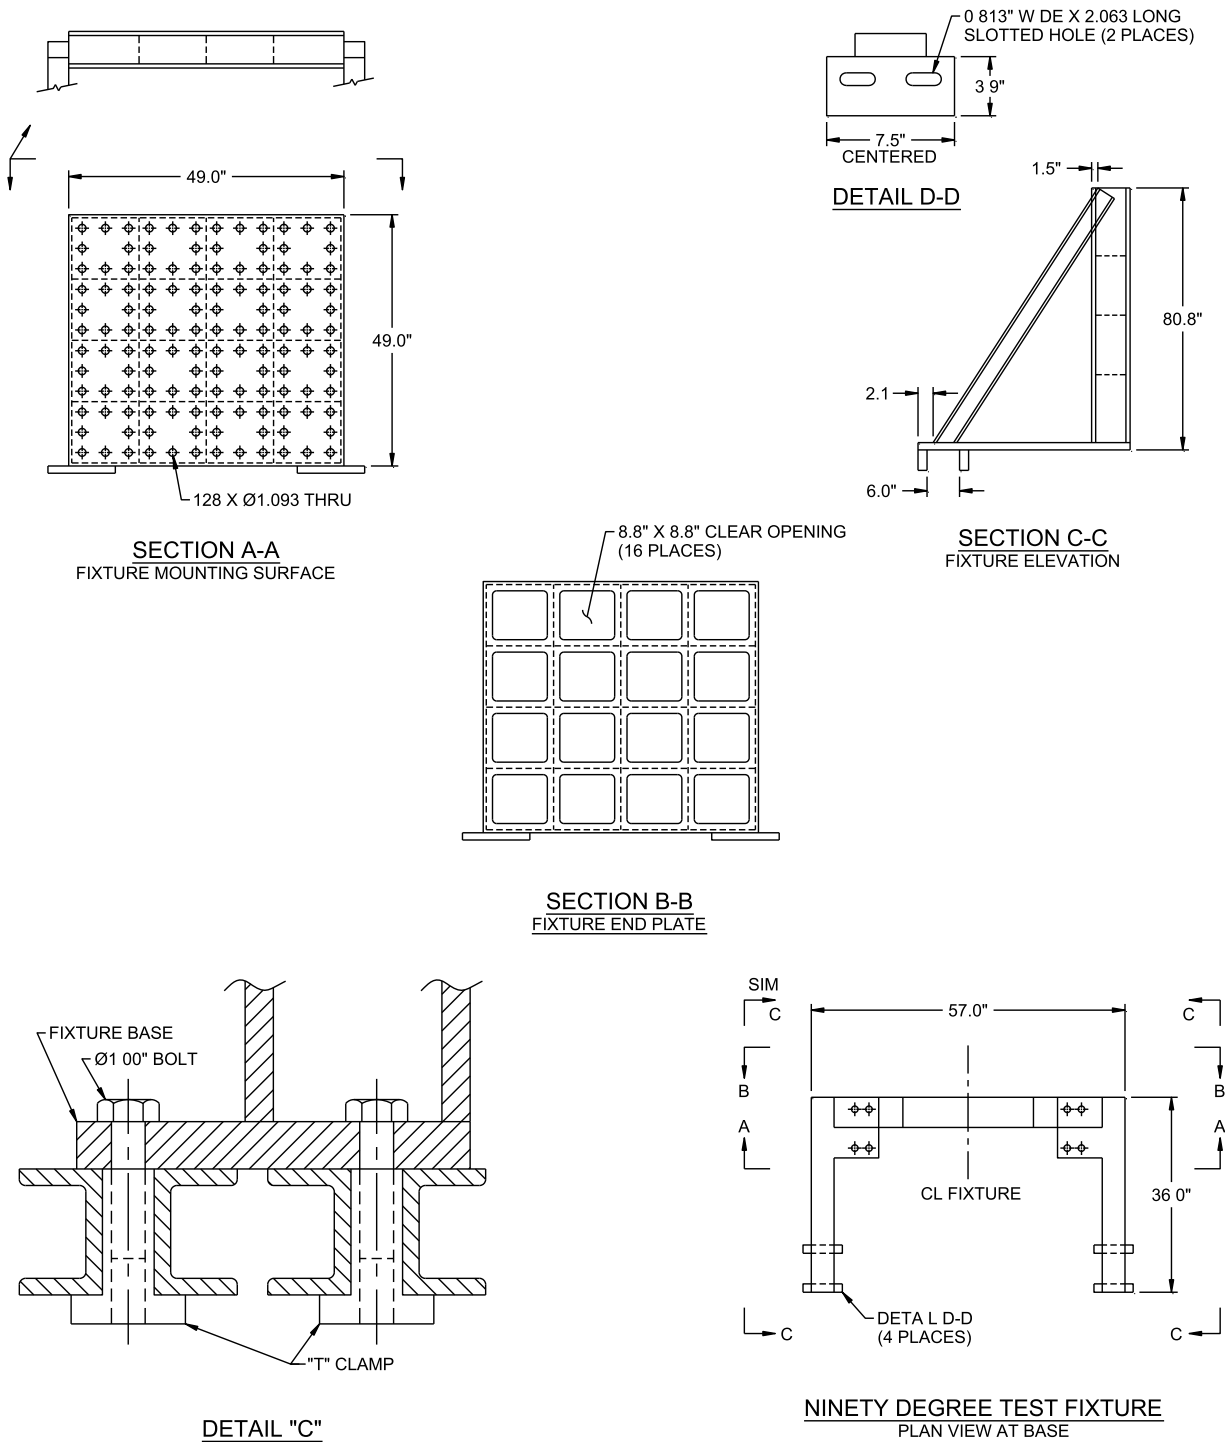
90-degree test fixture assembly. (Sheet 2 of 2)
